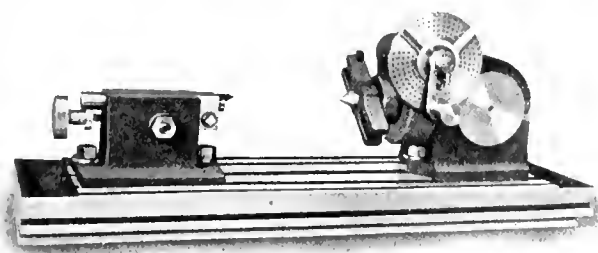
Universal Centers for the Chicago Duplex Hand Miller
